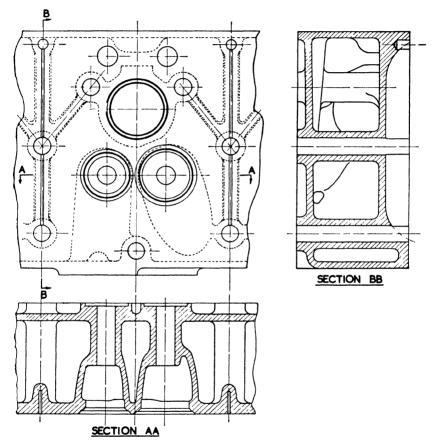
Section of cylinder head showing slots in lower deck to allow of thermal expansion
